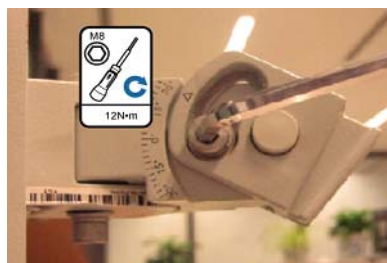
Fixing the angle adjusting component onto the mounting frame
